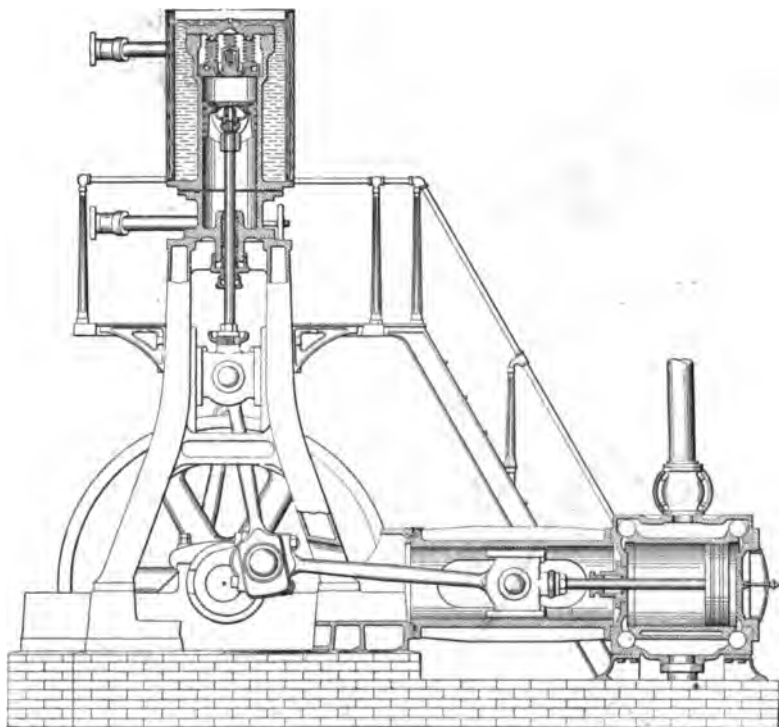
SECTION YORK MFG. CO.'S COMPRESSOR.
